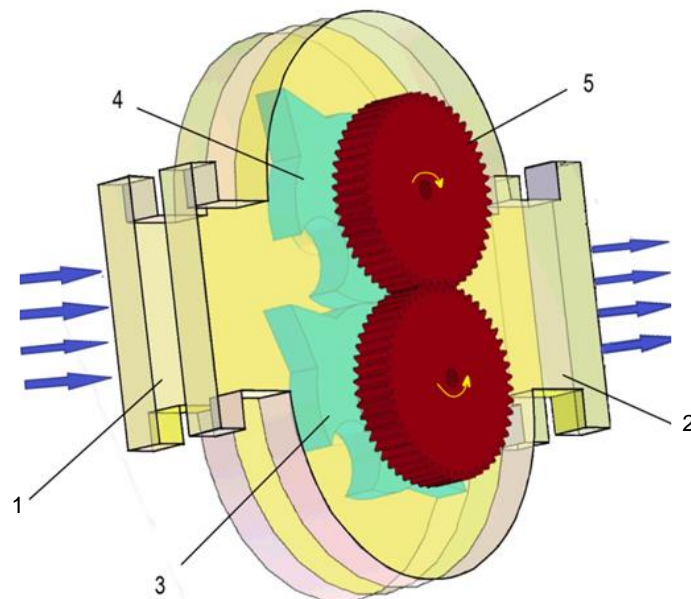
Cylindrical gear mounted on the shafts of the two rotors
